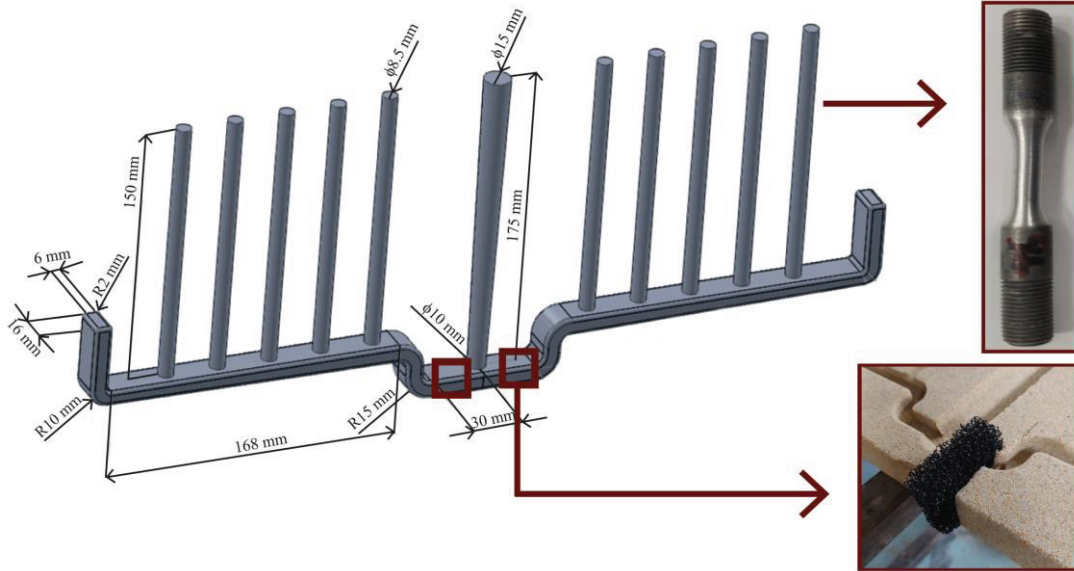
SolidWorks drawing of casting system with photographic images of real test place of ceramic filter (bottom right) and aluminum alloy bar after casting for the mechanical test (top right). (Source: Semerci, T. et al., 2022)²⁷¹
